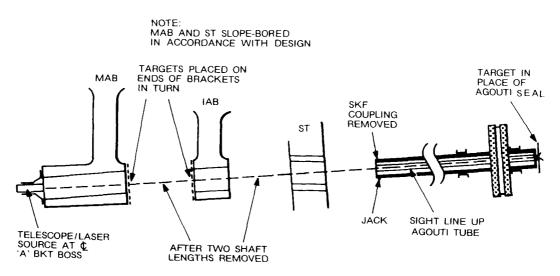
METHOD USED FOR SHAFT ALIGNMENT CHECKING
